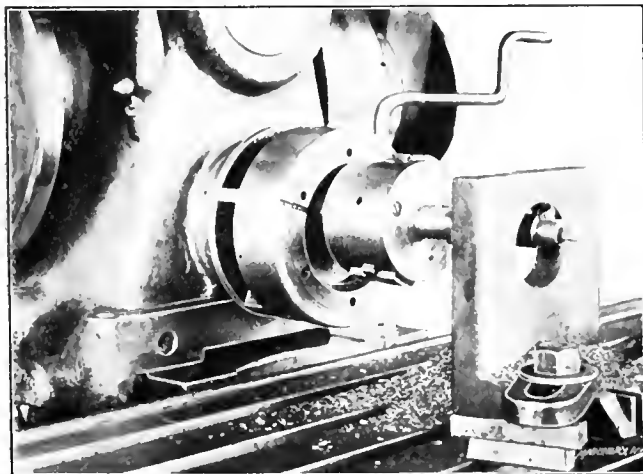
Enlarging the Drilled Hole with a Boring Tool.
